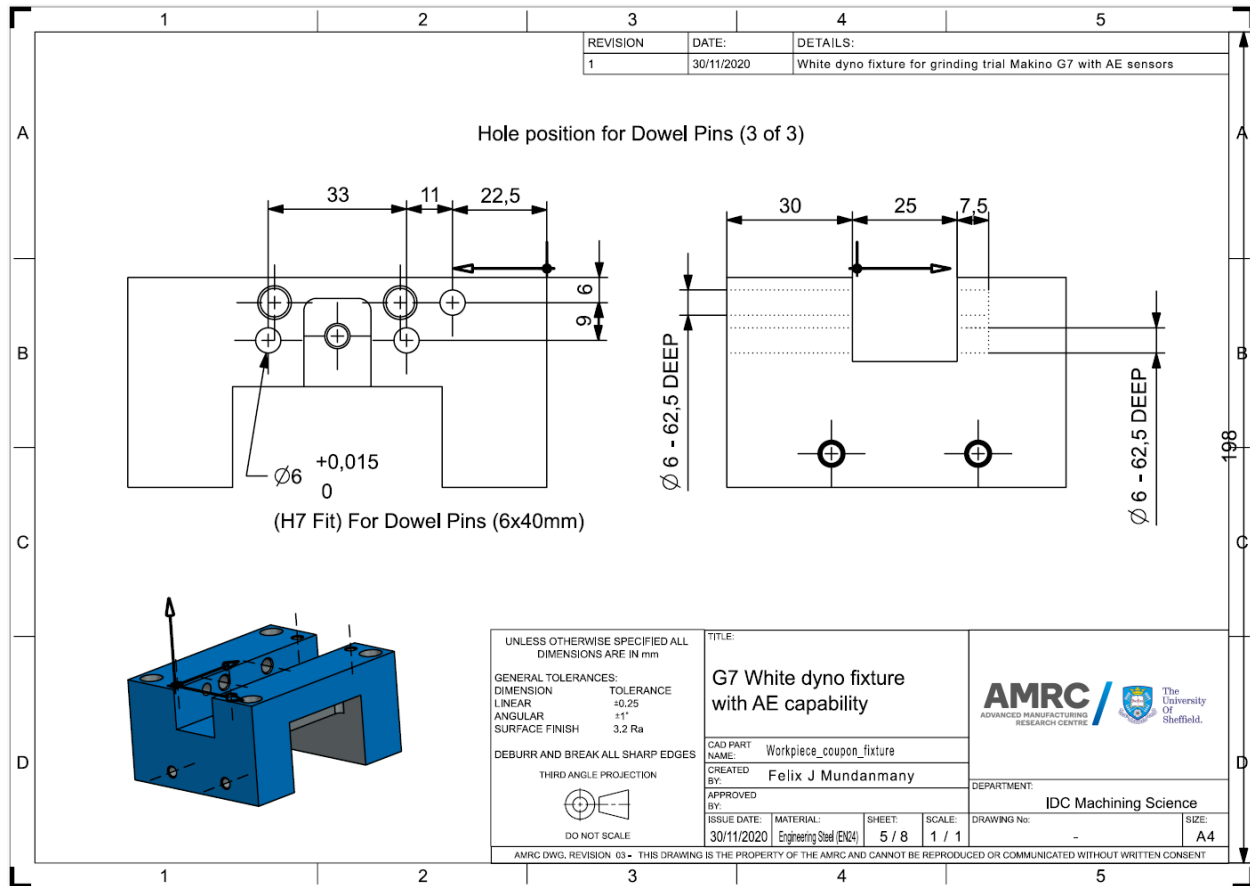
Drawing showing the position of holes for dowel pin that act as locators for the workpiece coupon.
